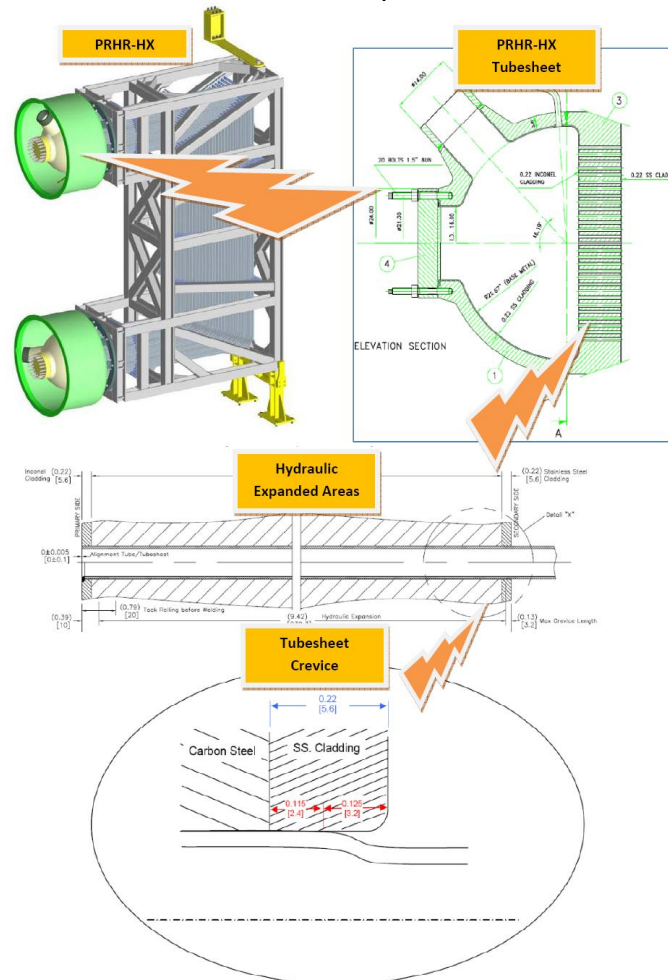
PRHR HX Tube-to-Tubesheet Joint
